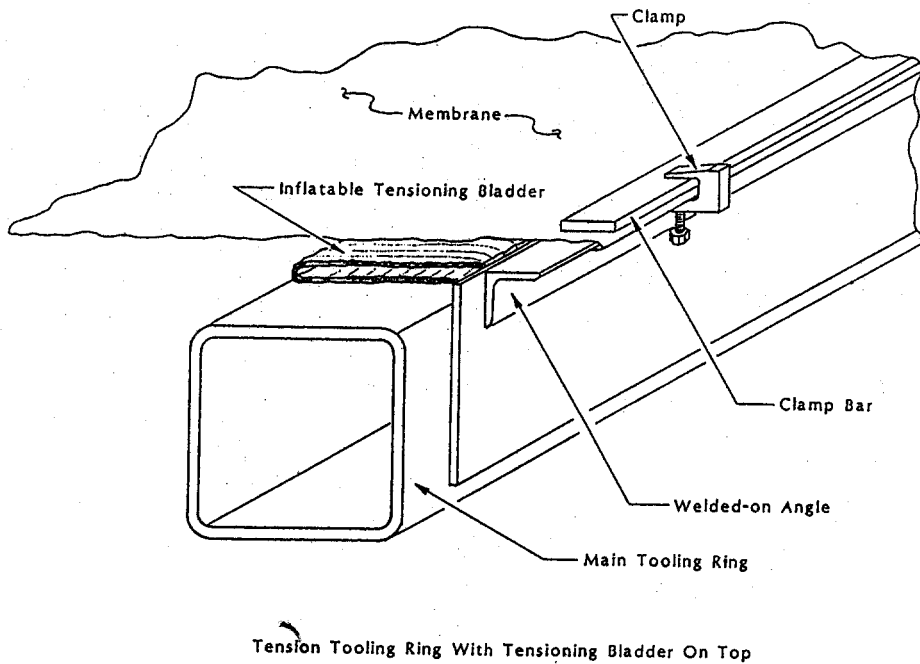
Membrane Tensioning Technique Using Bladder on Top Surface of Tooling Ring.
